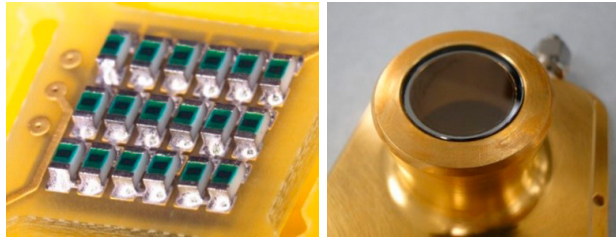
Soldering examples. Left, rows of 0402 chip resistors soldered onto FR4 board with 63Sn/37Pb solder paste, which melts at 183°C, and reflowed at peak temperature of ~220°C. Right, a glass window soldered onto a gold-plated aluminum housing using an In/Pb/Ag solder ribbon to form a vacuum seal.
